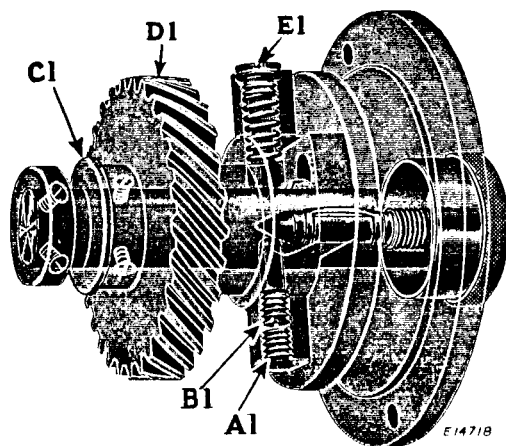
Transparent view showing the needle vibrator regulating spindle head in front of Machine
